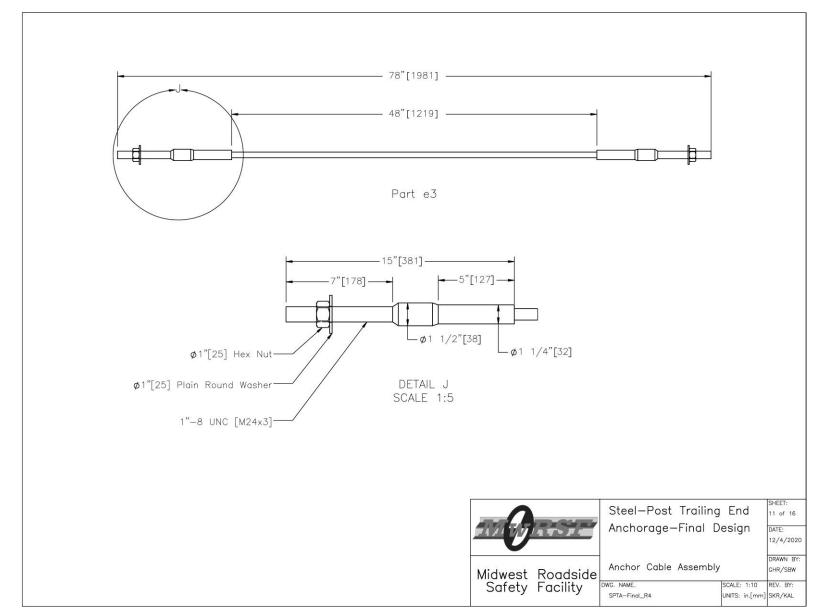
Steel-Post Trailing End Anchorage, Anchor Cable Assembly
